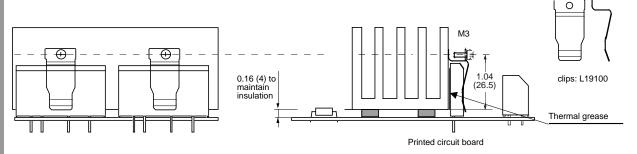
Clips with screws on standard heat sinks; dimensions in inches (mm)
